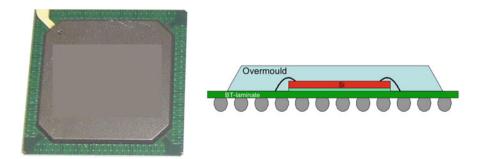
Picture and schematic drawing of the PBGA $35 \times 35 \text{ mm}^2$ package
